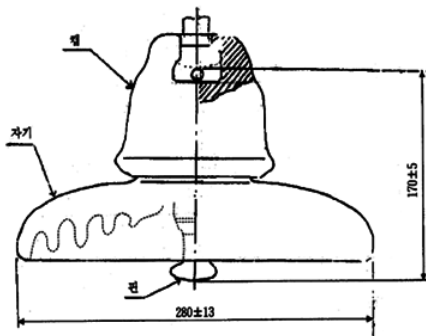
NGK 210kN IEC ball & socket type insulator for 345kV suspension insulator strings.
